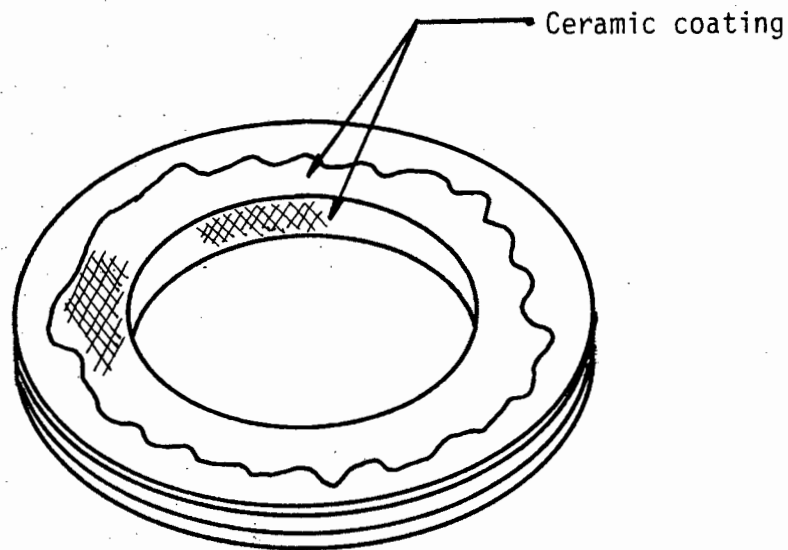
Illustration showing the faces on the valve seat which were coated in ceramic paste.
